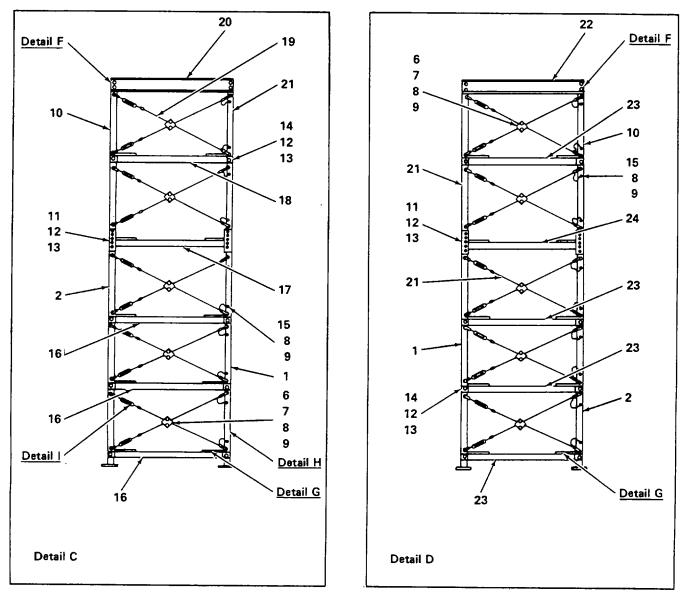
Tower Assembly (Sheet 3 of 5)
